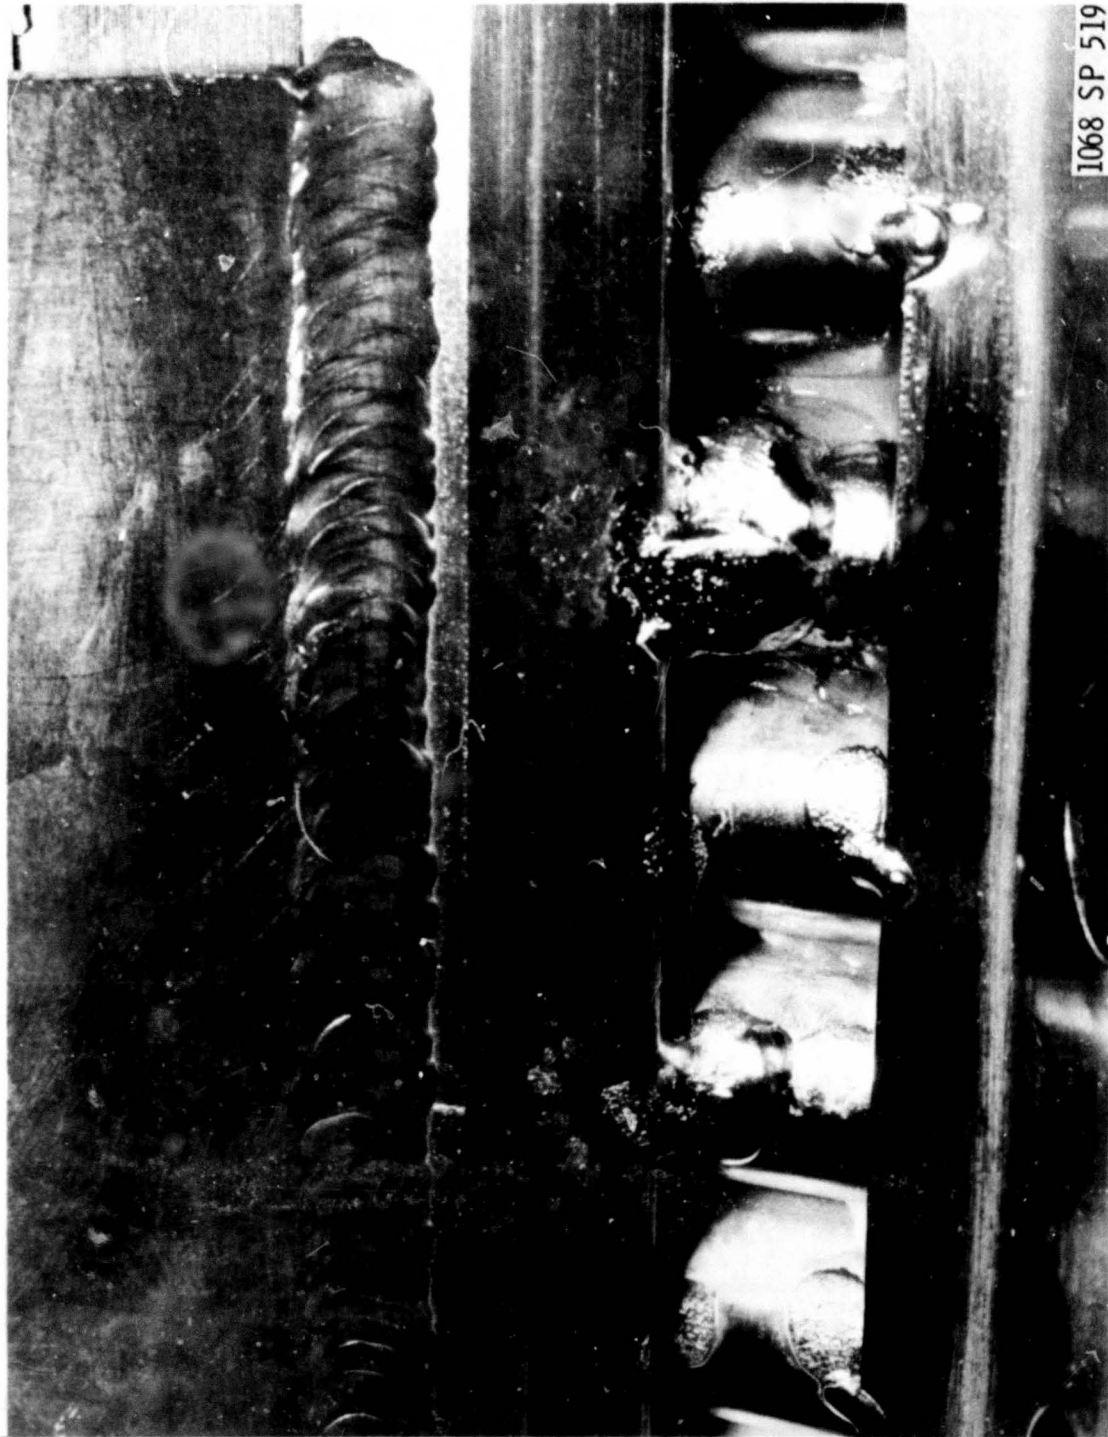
Repair of Weld Cracks -- Chamber S/N 002
